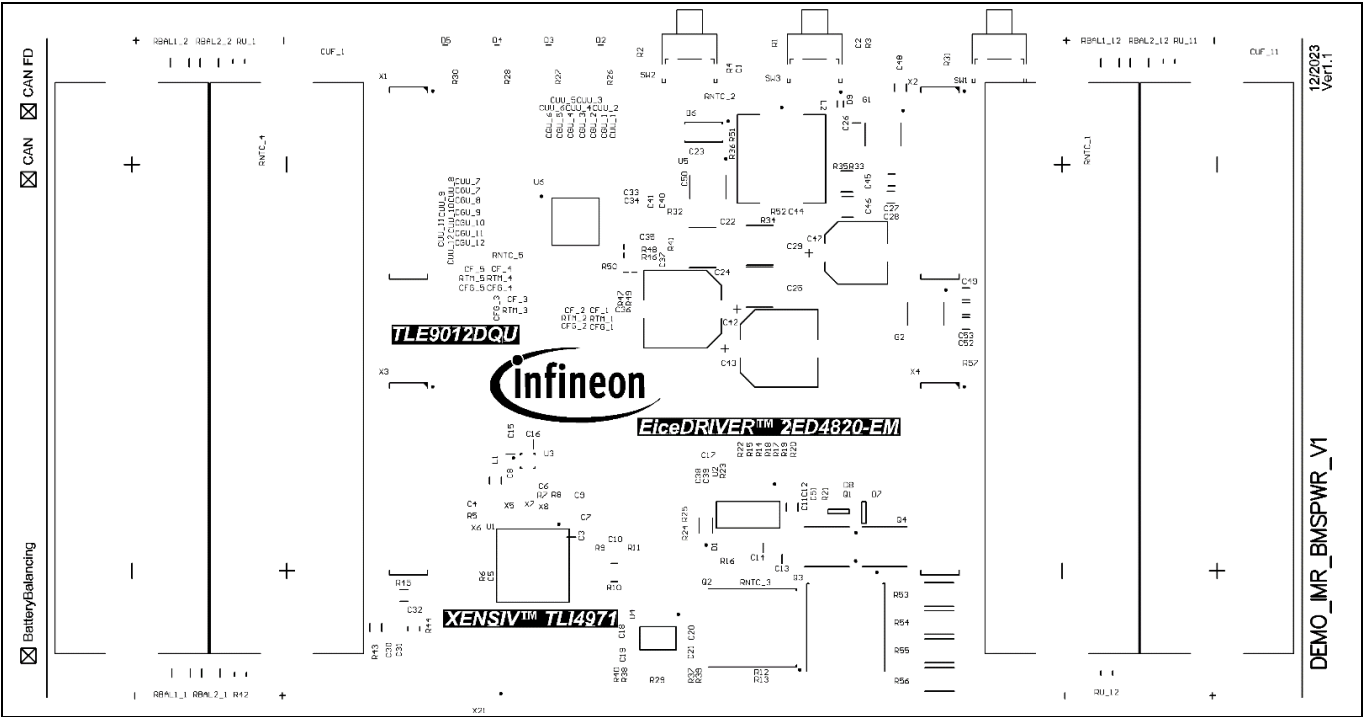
DEMO_IMR_BMSPWR_V1 PCB top silkscreen layer
